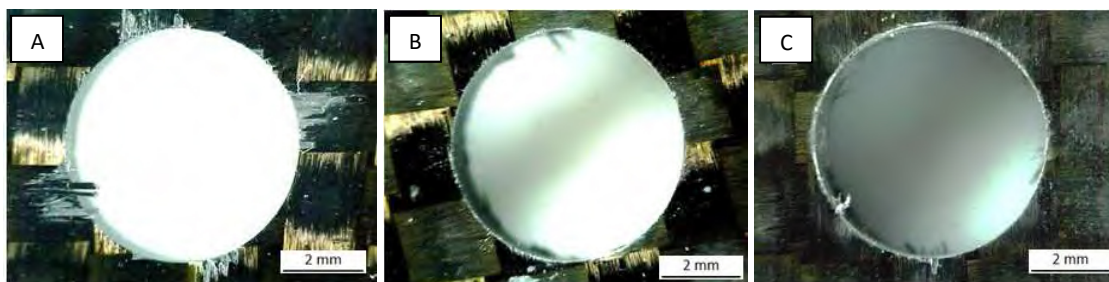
Peel up delamination at the hole entrance for new tool (A), flank wear tool (B) and honed edge tool (C) with point angle 118°, V = 50 m/min and f = 0.05 mm/rev.
